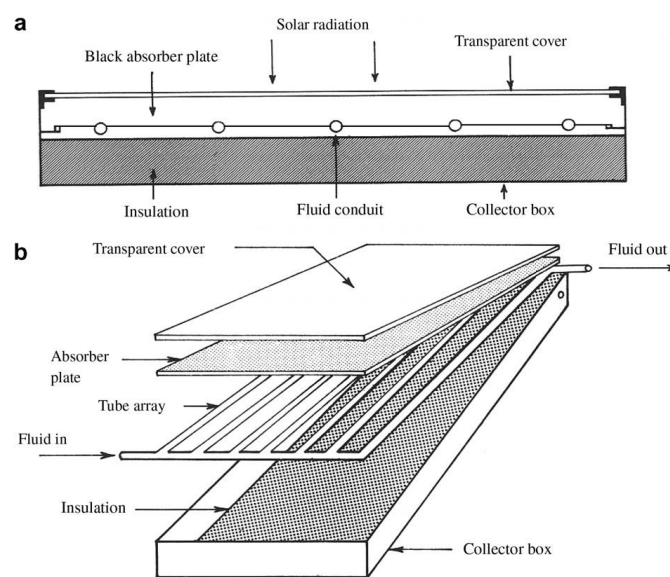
pictorial view of flat plate solar collector including components: a) cross-sectional view and b) top view [7]
